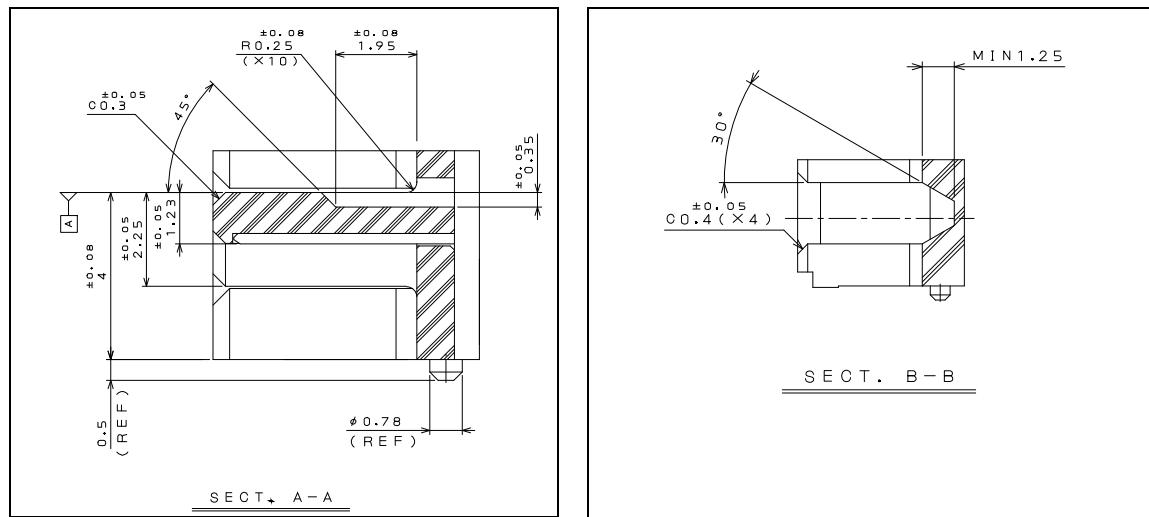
7.0 mm Slimline device plug connector interface dimensions section A-A
